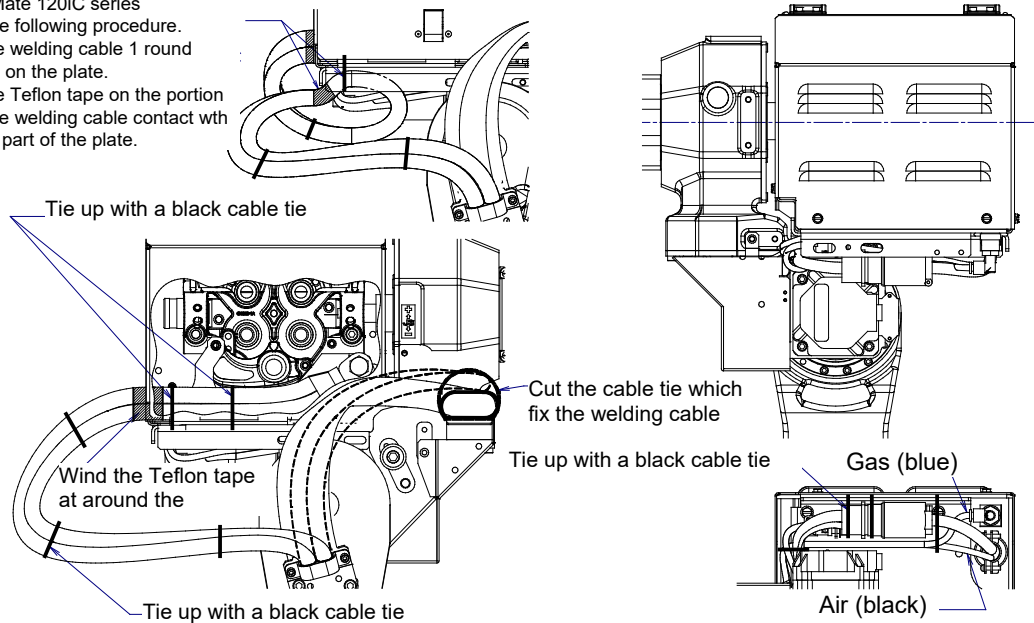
(d) Wiring of the Wire Feeder AutoDrive 4R220 (1/2)
